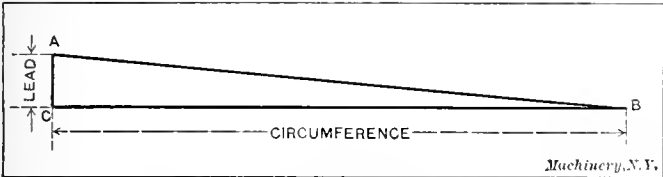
Diagram for Determining Angle of Threads in Thread Rolling Dies
